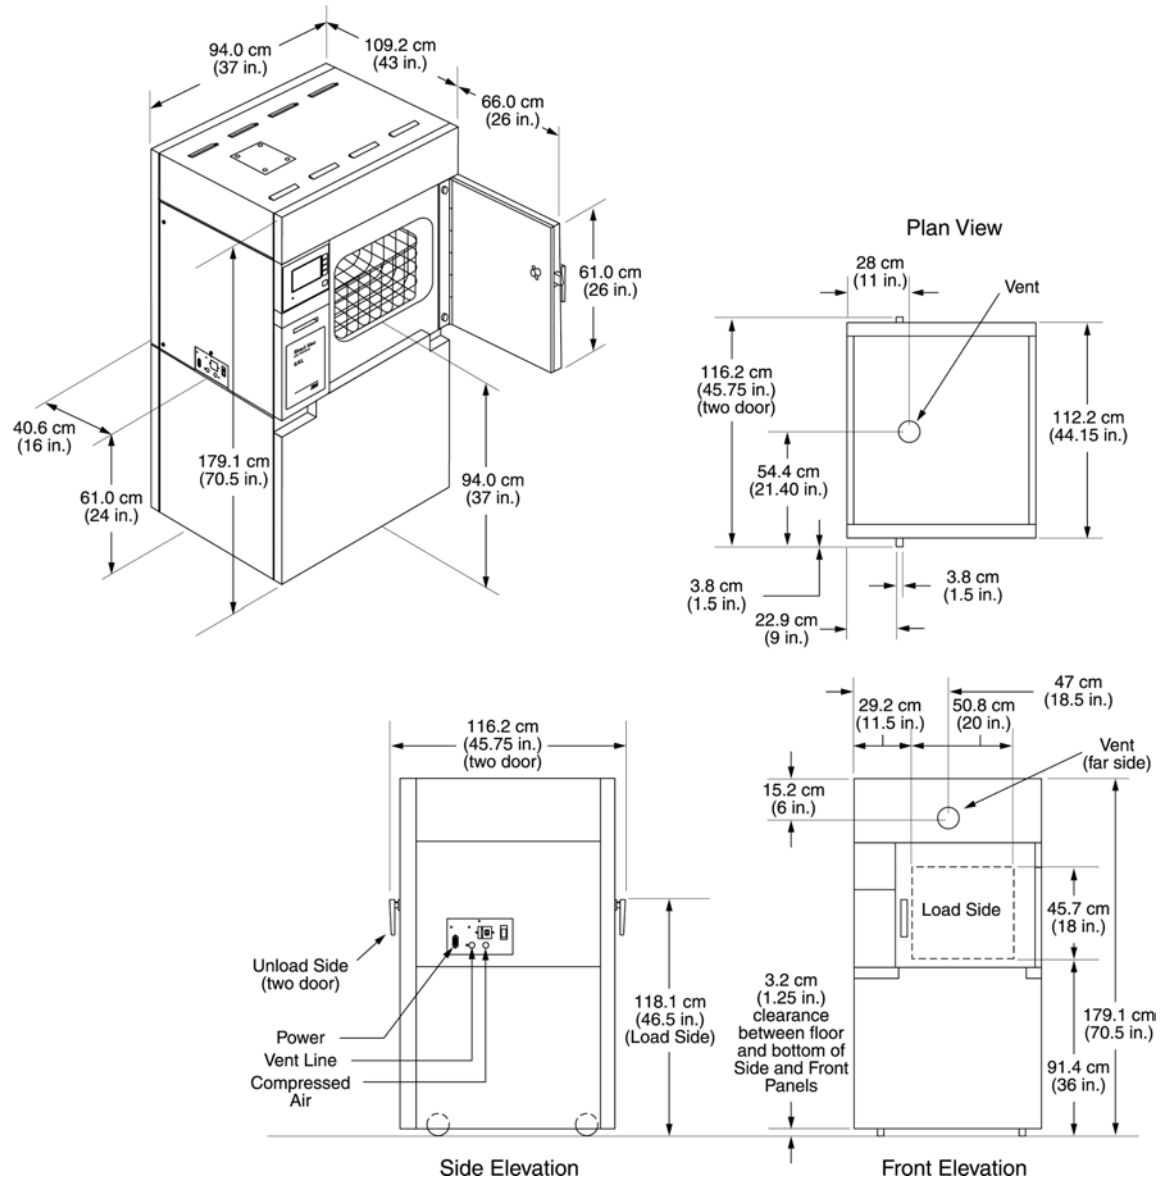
Steri-Vac 8XL Sterilizer Dimensions.
